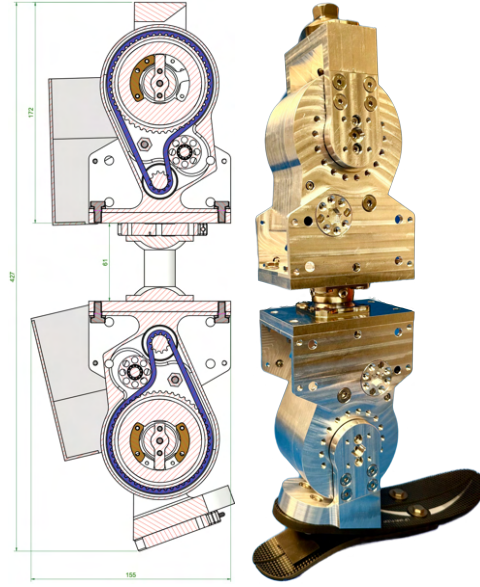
Left: Technical drawing of the redesigned model. Right: Built version. Hardware designs are available as open source at [10] and [6].
